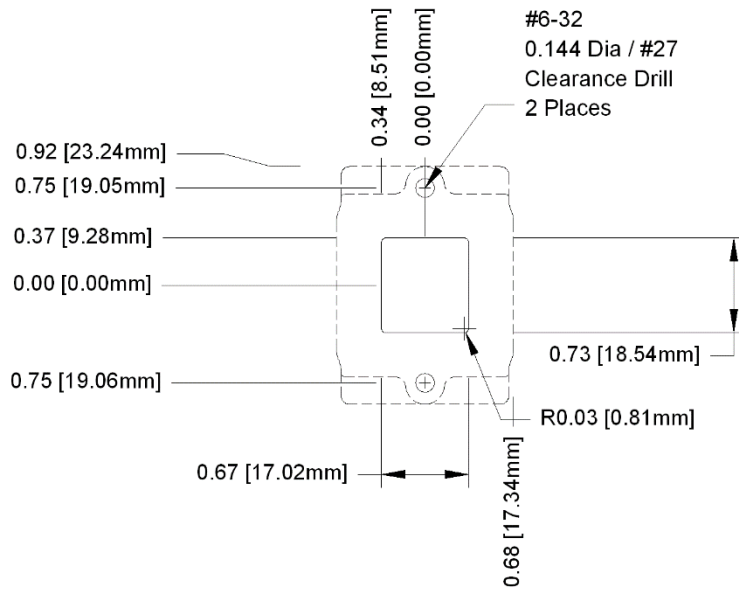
Panel Cutout, #6-32 Mounting Screws
